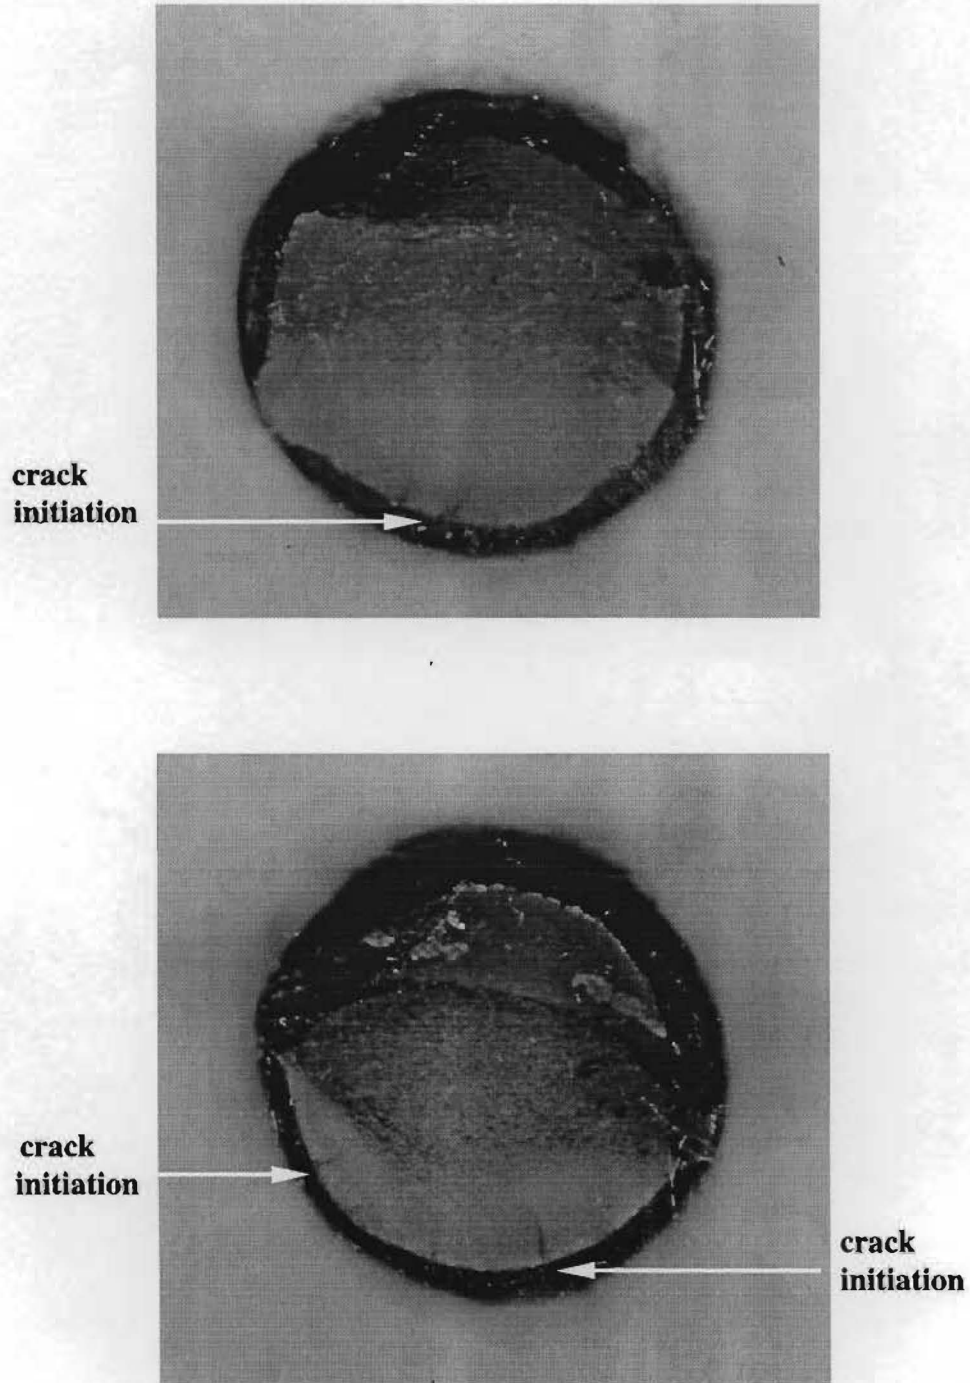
Fatigue Crack Surfaces on FK5S60 Bars
